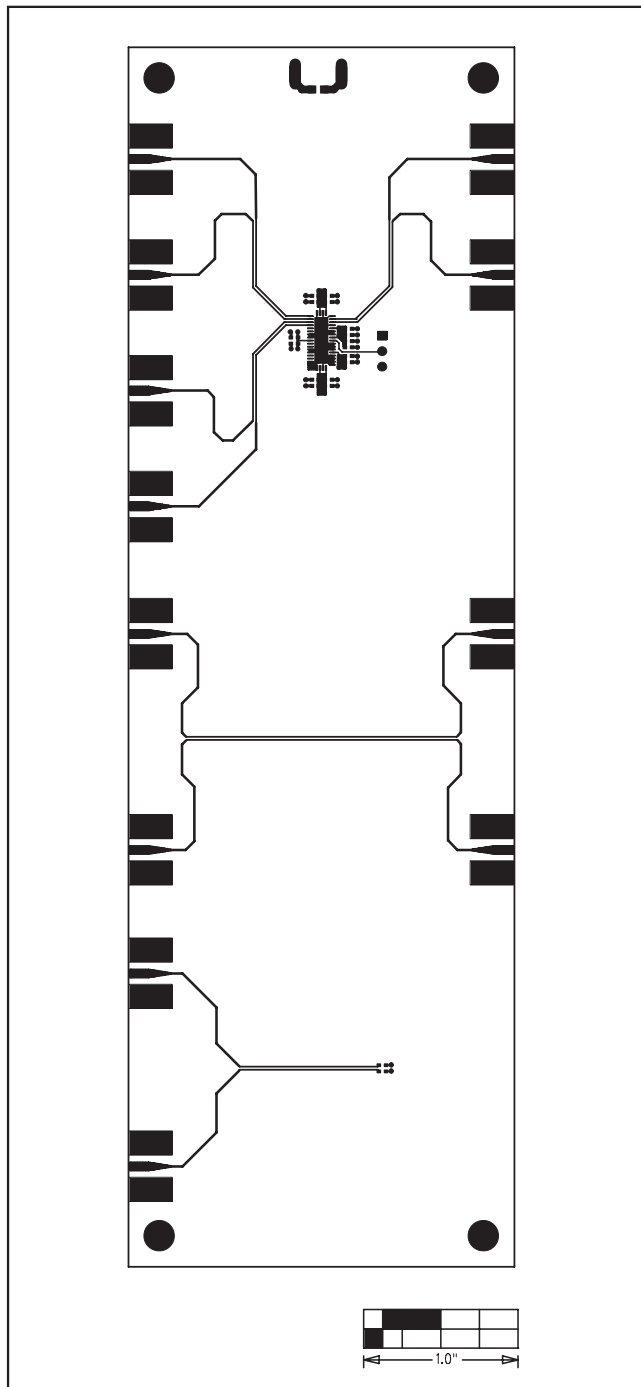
MAX4889B EV Kit PCB Layout—Component Side
